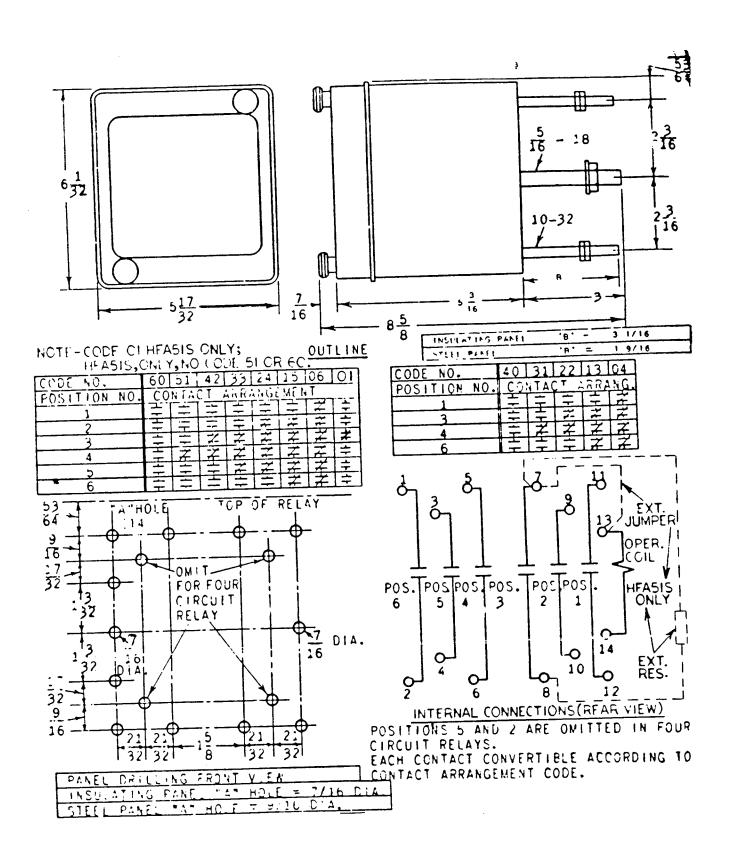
(K-6178931-12) OUTLINE AND PANEL DRILLING FOR SURFACE MOUNTED TYPE HFA51- \*RELAYS
